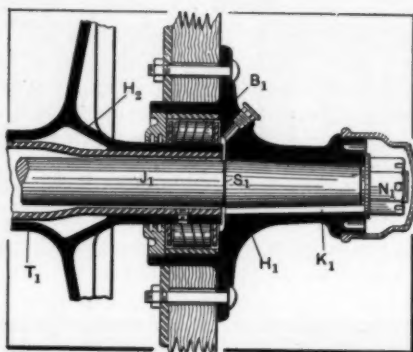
Section of a live rear axle, showing the use of a Hyatt roller bearing and a closure to keep out foreign substances.
